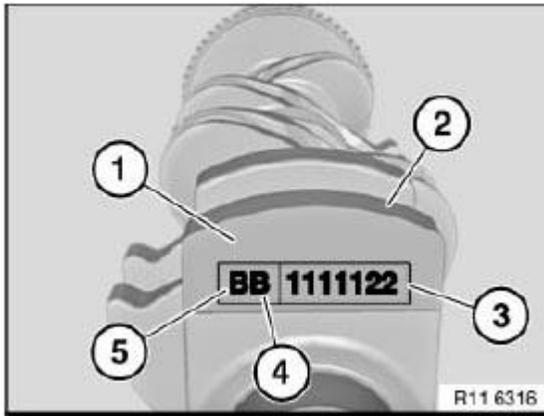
Identifying Seven Digit Code On Crankshaft Web Surface
